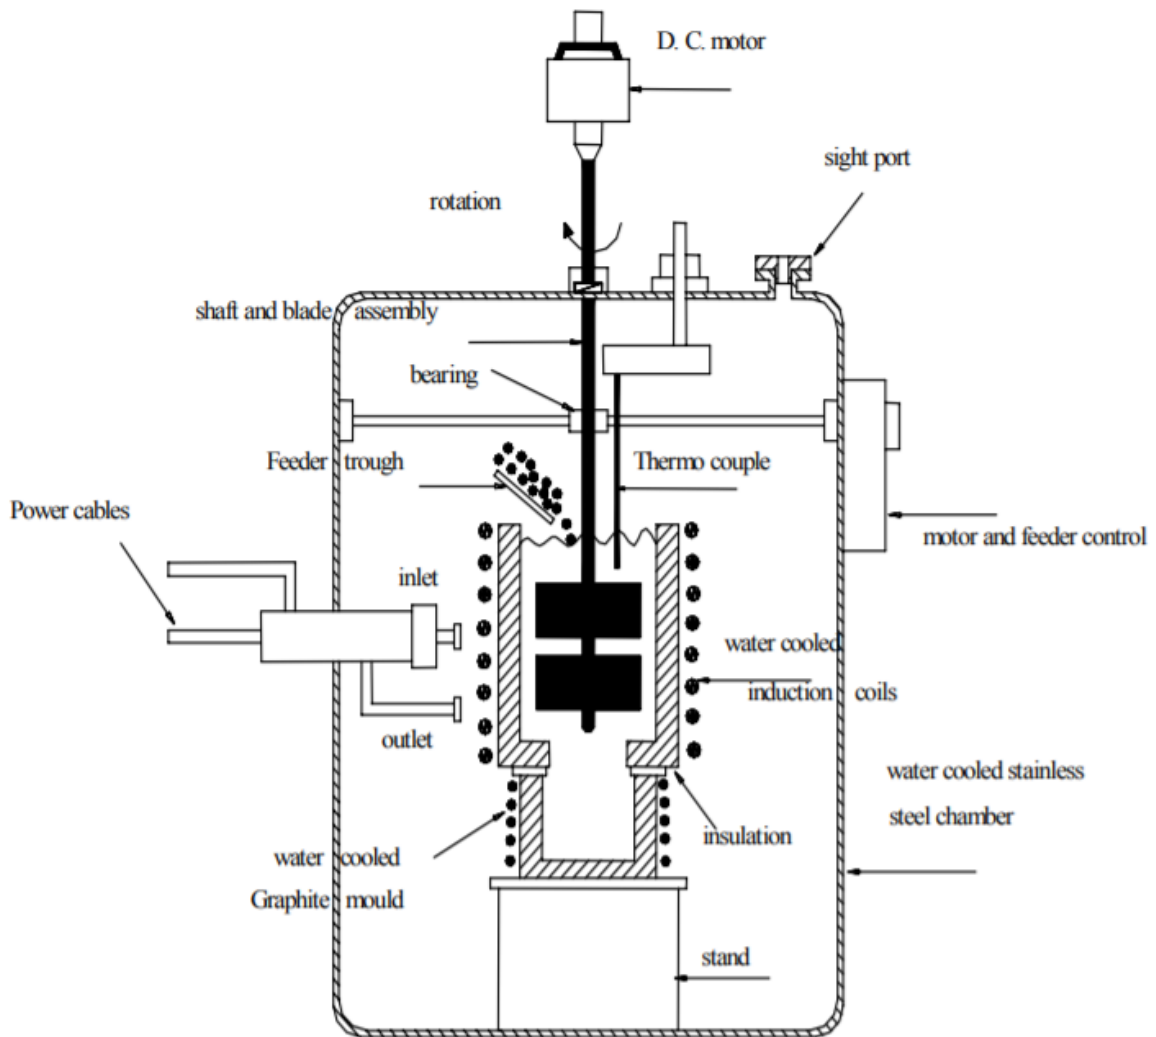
shows the schematic representation of the compo casting apparatus used to make the composites. An inductive power supply (50 kW, 3000 Hz), a water-cooled vacuum chamber with mechanical and diffusion pumps, and a furnace and mixing equipment for agitating the composite make up the device.
